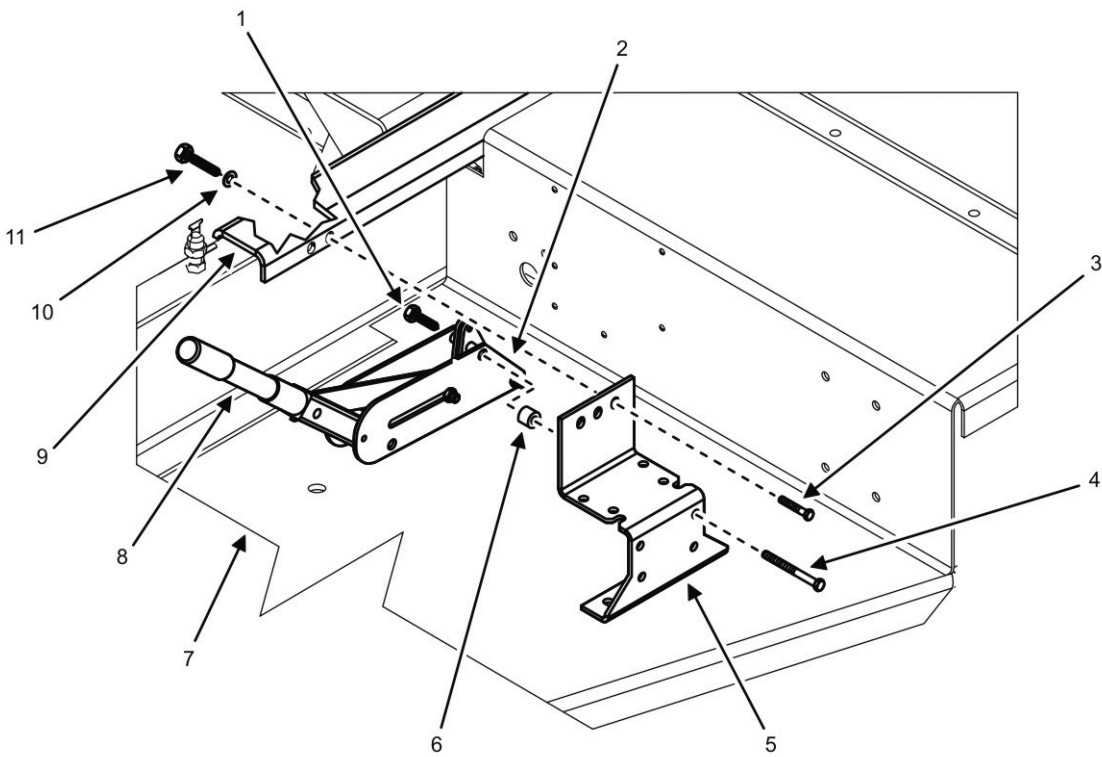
Hand Brake Bracket and Hand Brake — Detail.
